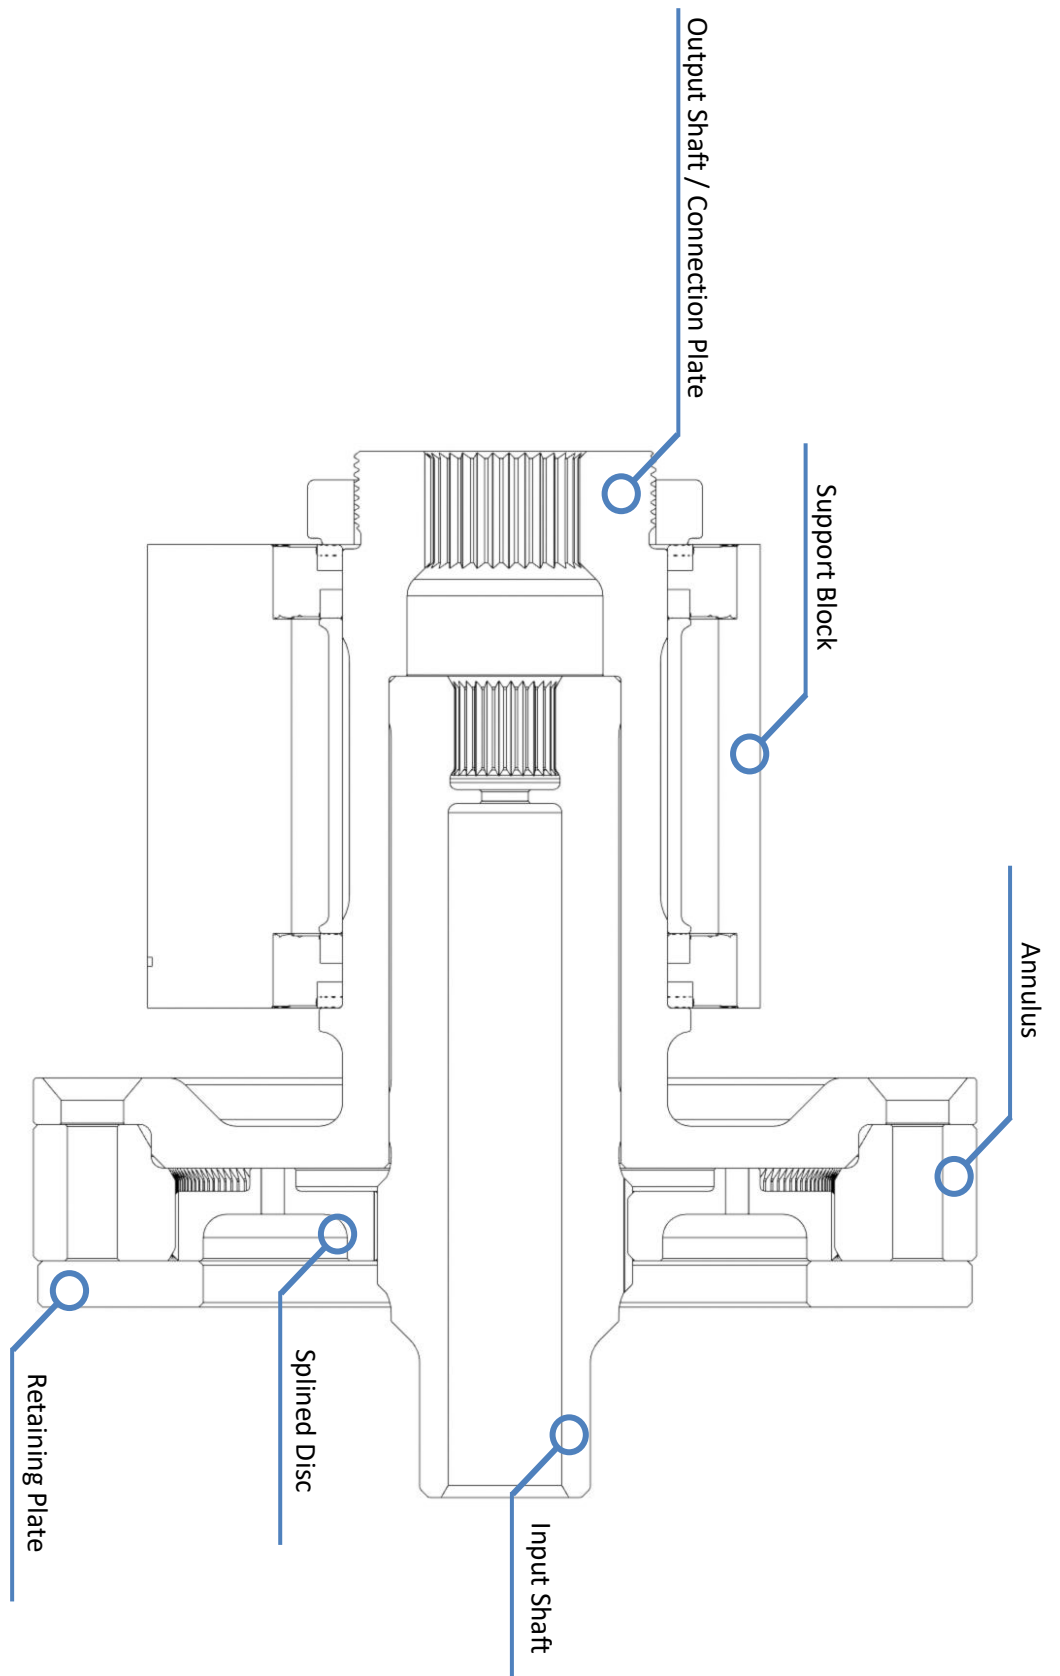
Planar sectioned view of the Cardiff gear test rig torque head.
